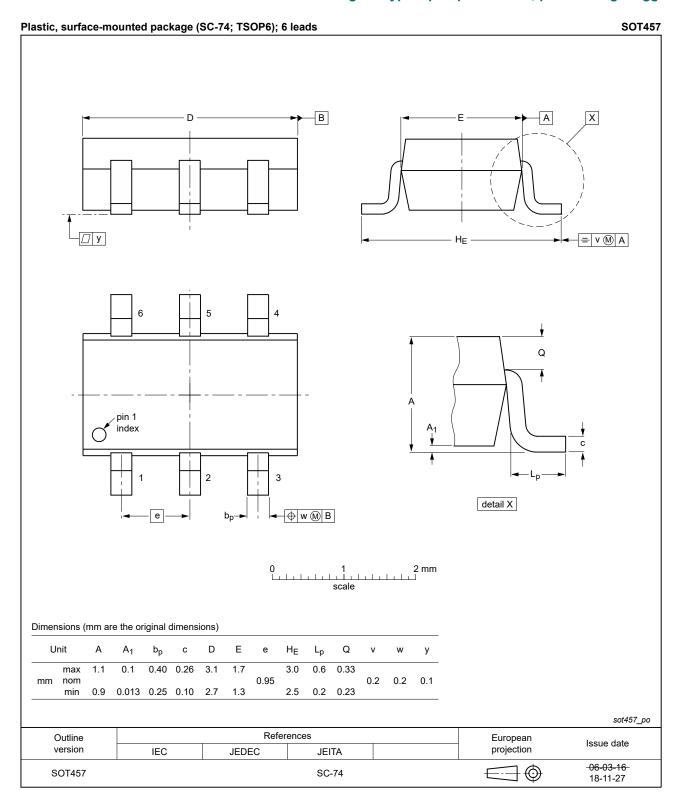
Package outline SOT457 (SC-74; TSOP6)
